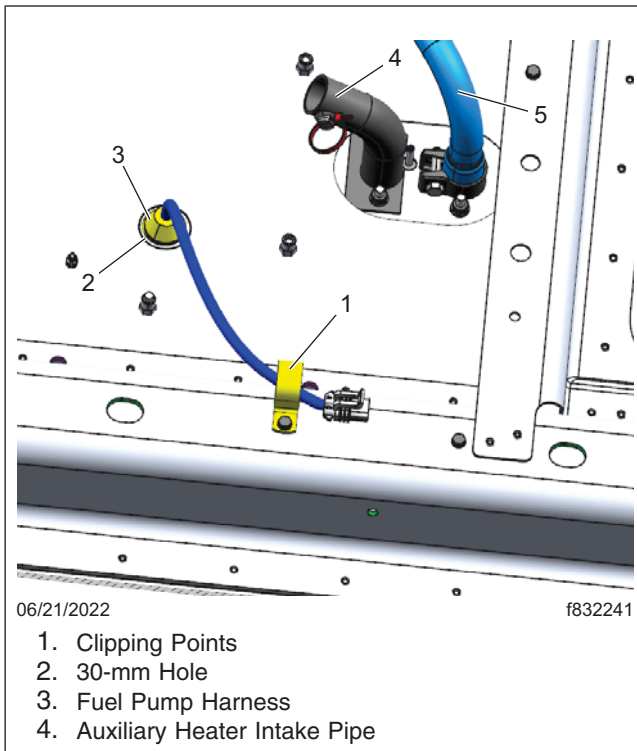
, Clipping Points, 30 mm Hole, Fuel Pump Harness and Auxiliary Heater Intake Pipe
